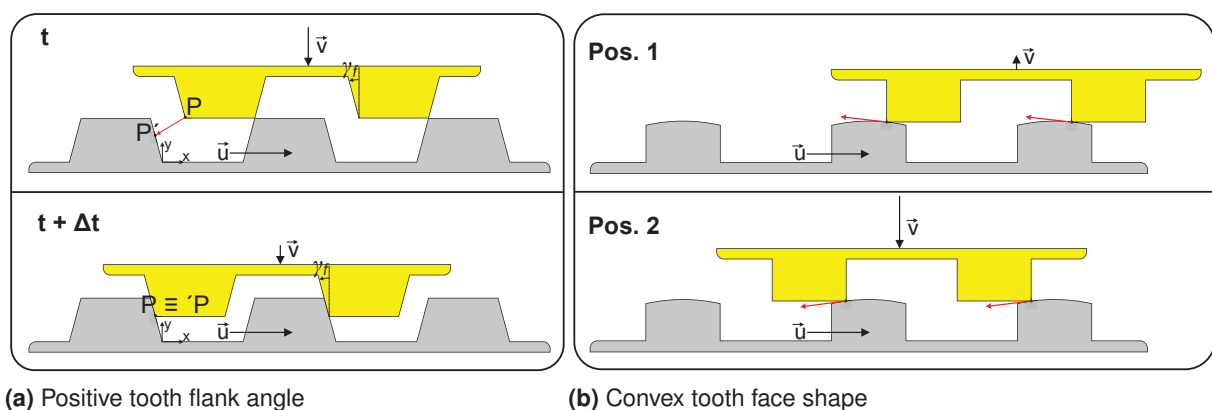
Schematic representation of engagement process with positive tooth flank angle (a) and with different circumferential overlaps for convex tooth face shape (b)
